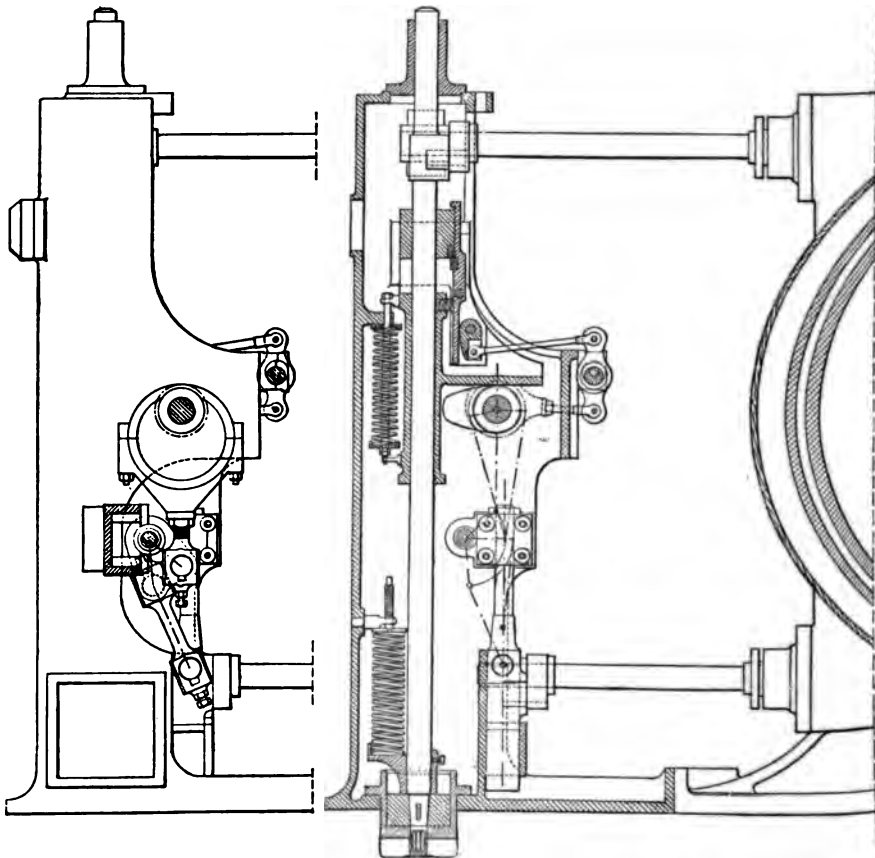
Hick : Valve-gear of Eagley Mill Engine. Scale $1/60$ th.
